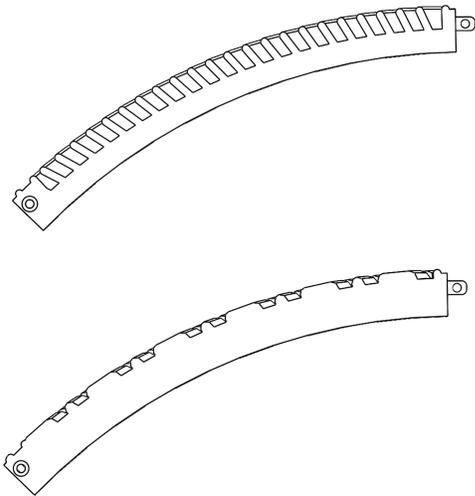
Side view of the first tread design (top); and second tread design (bottom).
